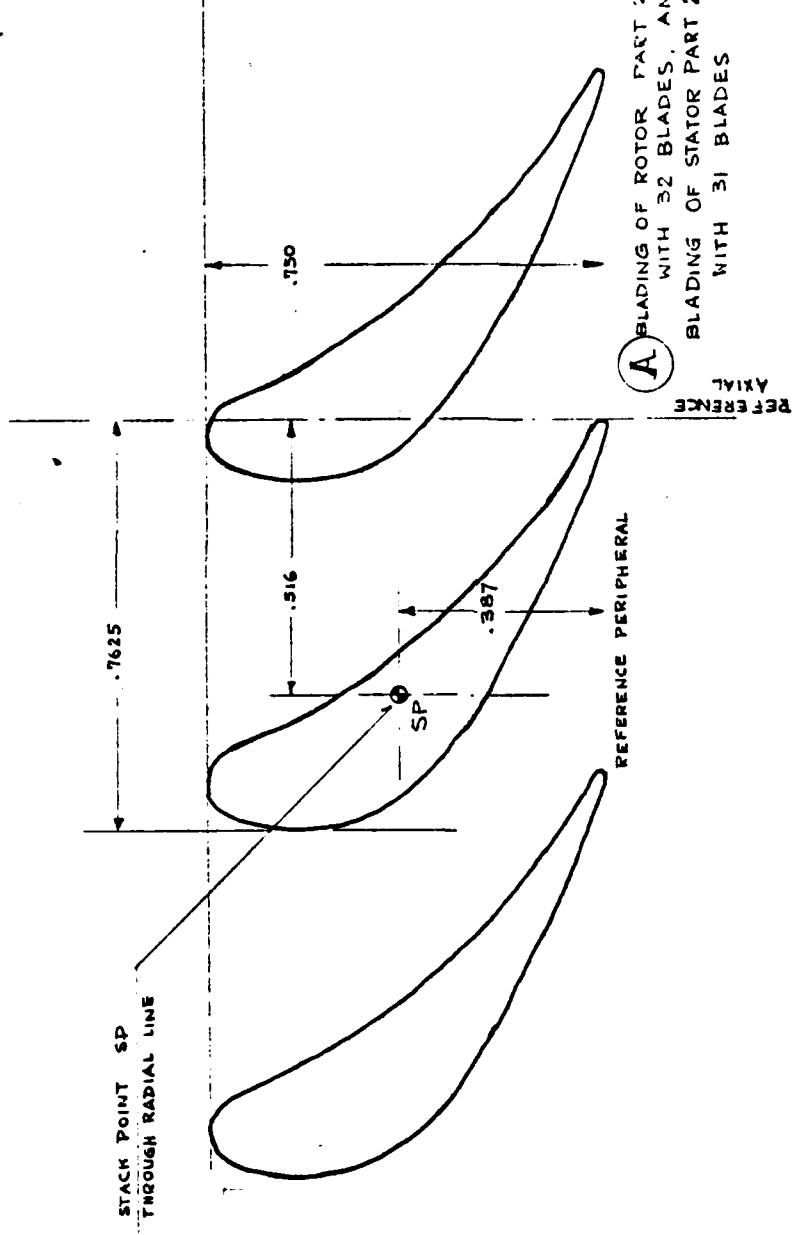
TURBINE ROTOR AND STATOR BLADE SHAPES
